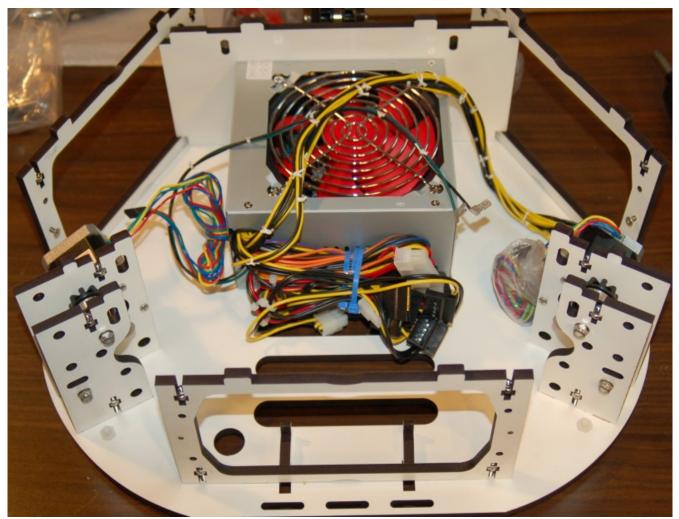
X* and *Y* axis tower & motor supports in place.
